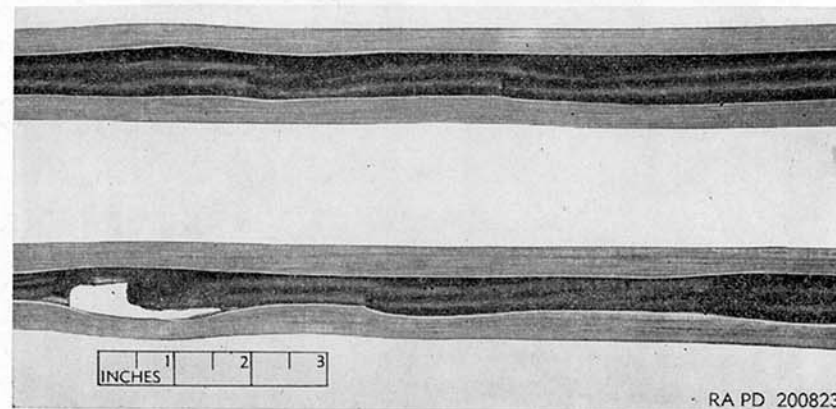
Barrel sections, cal..50 machine gun M3, damaged by firing when at excessive heat.
